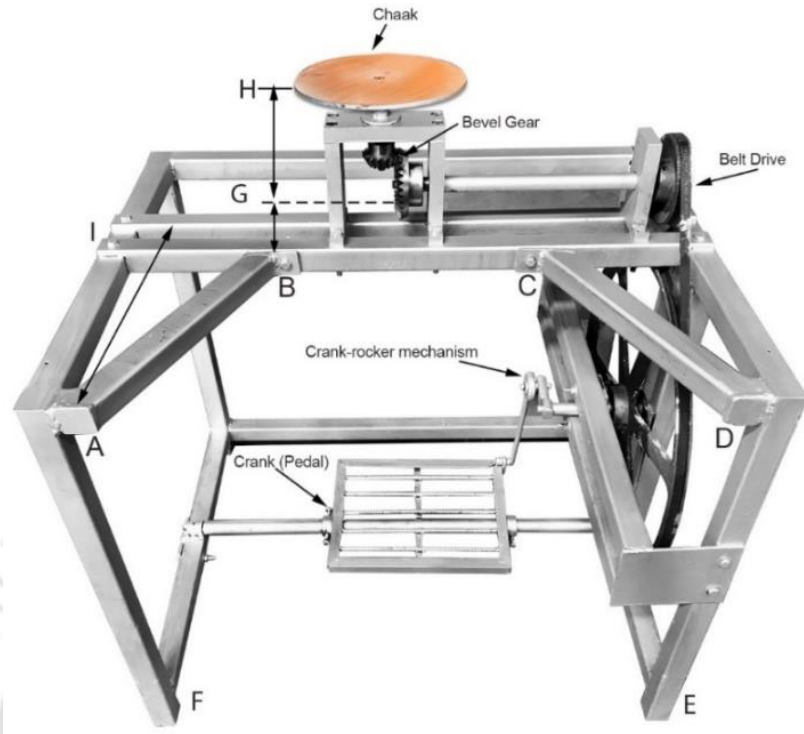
Showing the four-bar mechanism in the fabricated model of the machine
